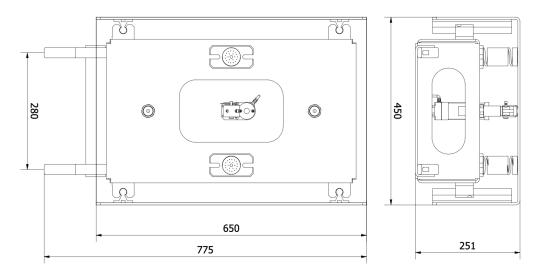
Design of the suspension system for a child car seat (dimensions [mm]).
